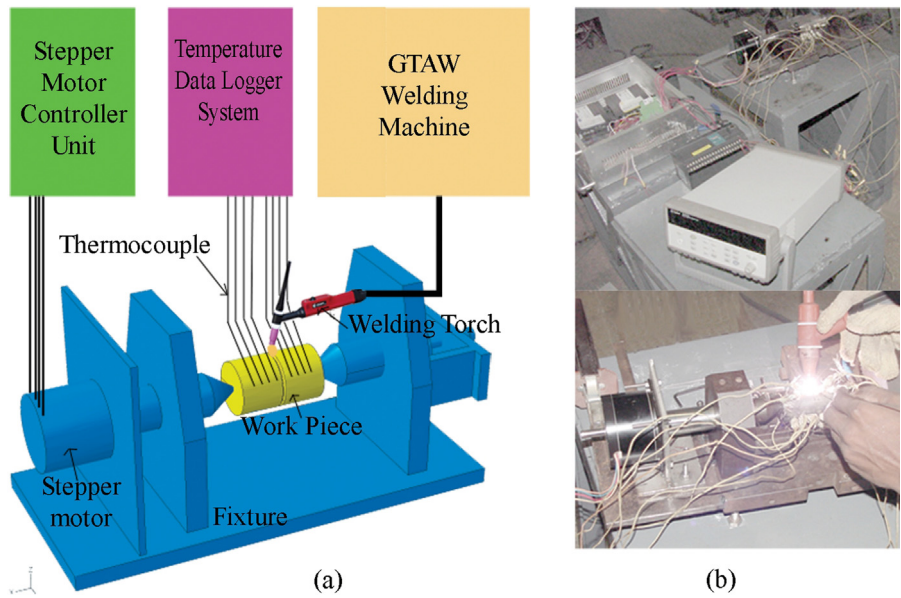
Experimental setup used (a) schematic diagram and (b) welding setup with clamping fixture and data logging system.
